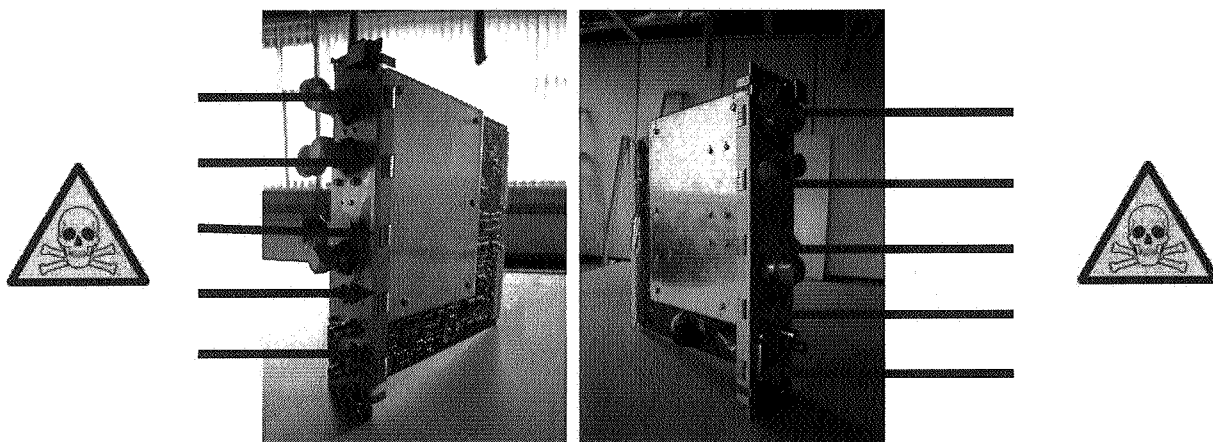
, Beryllium Sticky-Fingers on Printed circuit board assembly
